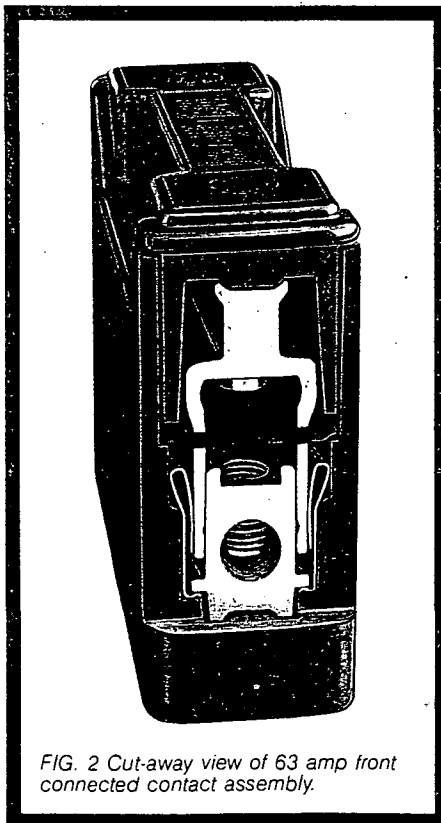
Cut-away view of 63 amp front connected contact assembly.
